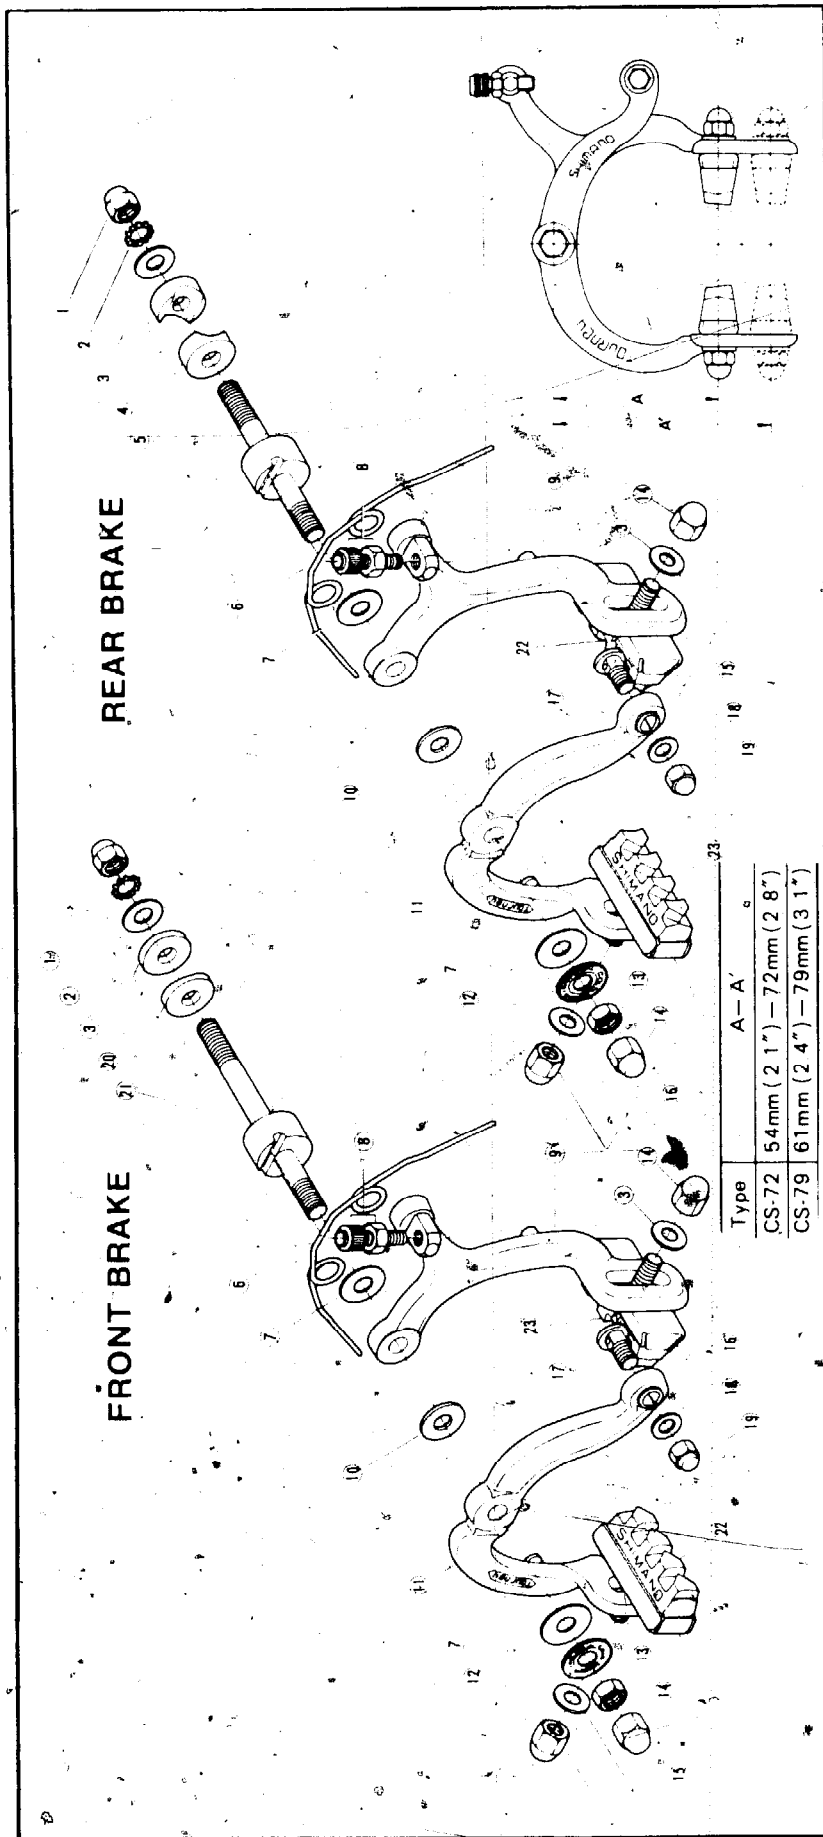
Exploded views of Shimano Tourney side-pull caliper brakes. Parts are: (1) lock nut for pivot bolt, (2) toothed lock washer, (3) washer A, (4) radius bushing—front, (5) pivot bolt—front, (6) arm return spring, (7) arm washer, (8) cable adjusting barrel and nut (9) brake arm Y shape, (10) arm spacer, (11) brake arm C shape, (12) washer C, (13) lock nut, (14) cap nut, (15) brake shoe complete—right, (16) brake shoe complete—left, (17) cable anchor bolt, (18) washer B, (19) cap nut, (20) radius bushing—rear, (21) pivot bolt—rear, (22) brake shoe—right and (23) brake shoe—left.
